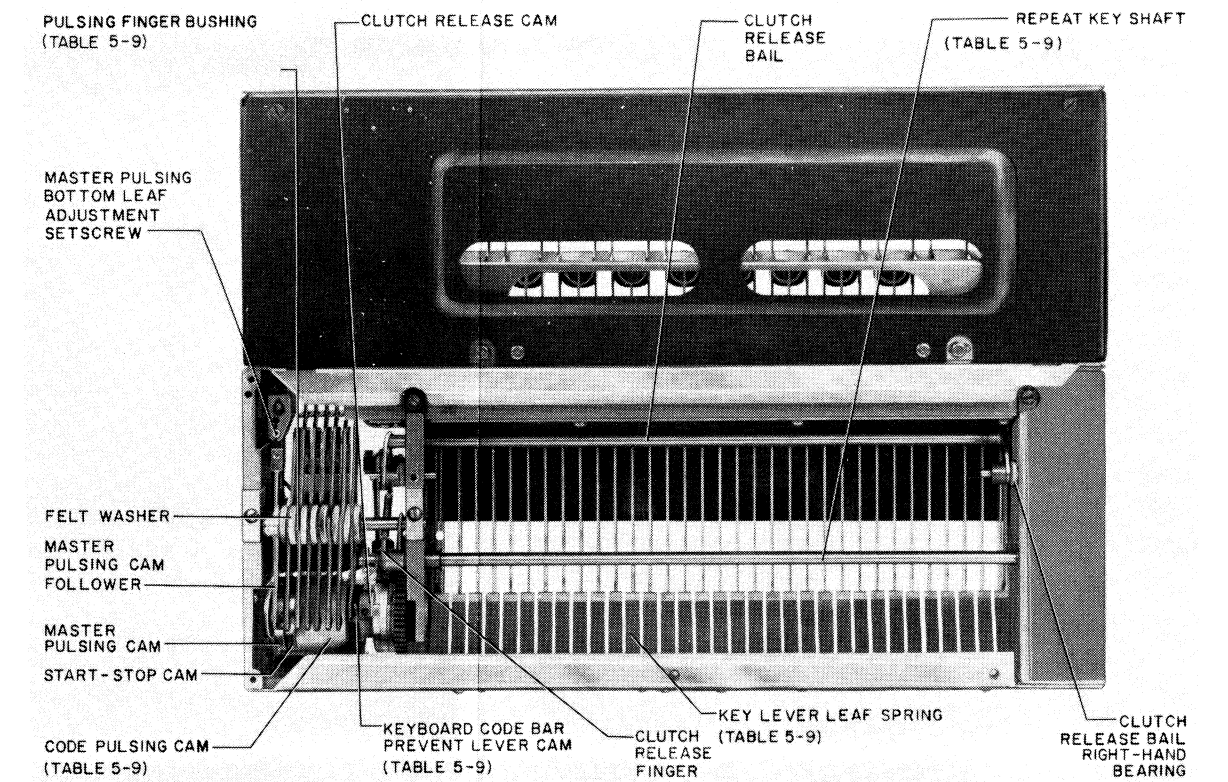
Keyboard Assembly, Bottom View (TT-318A/UG)
